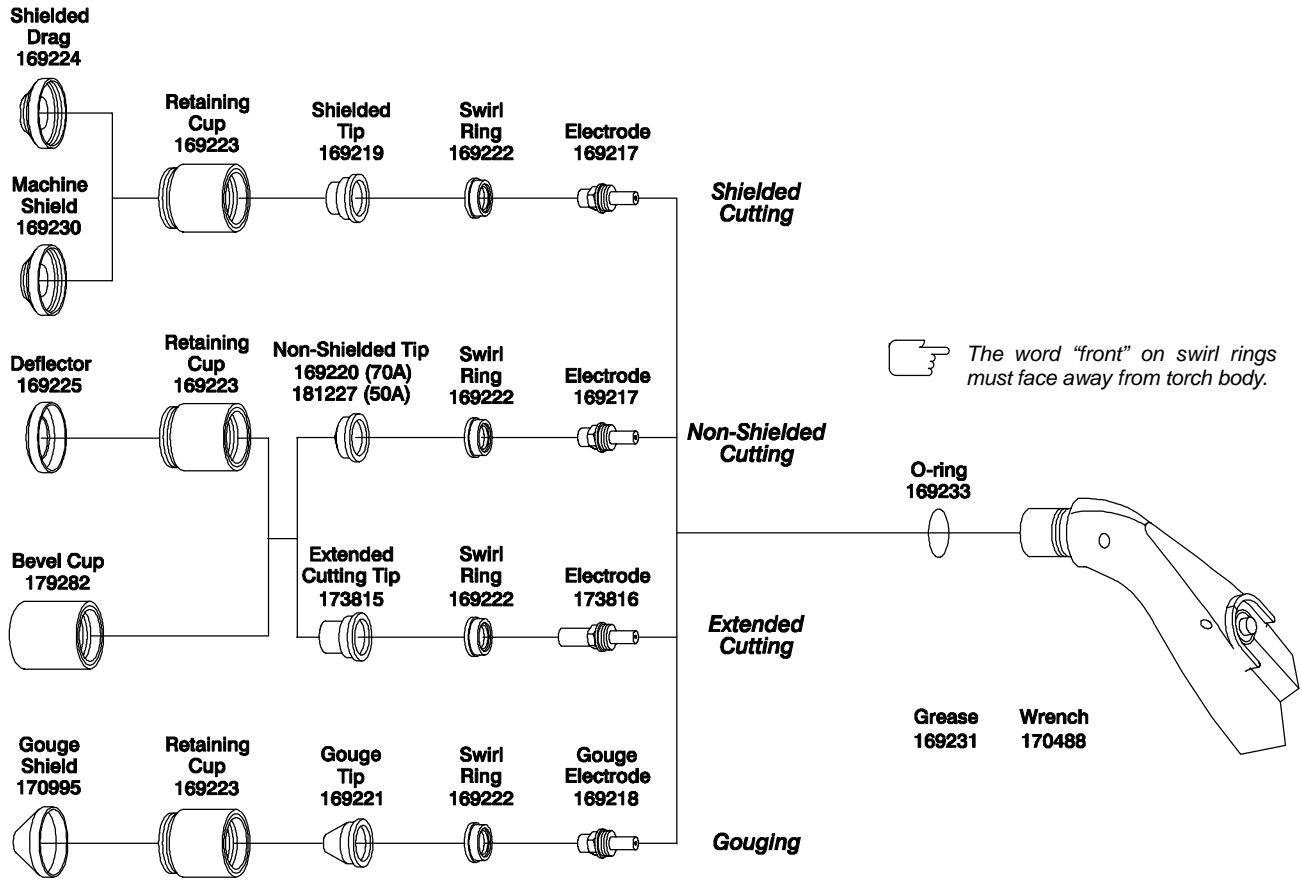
Consumables And Parts Supplied With ICE-50 Torch
